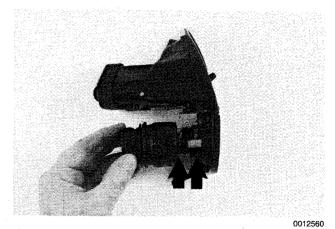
Fit groove on headlight switch into switch bezel on dash insert (arrows).
